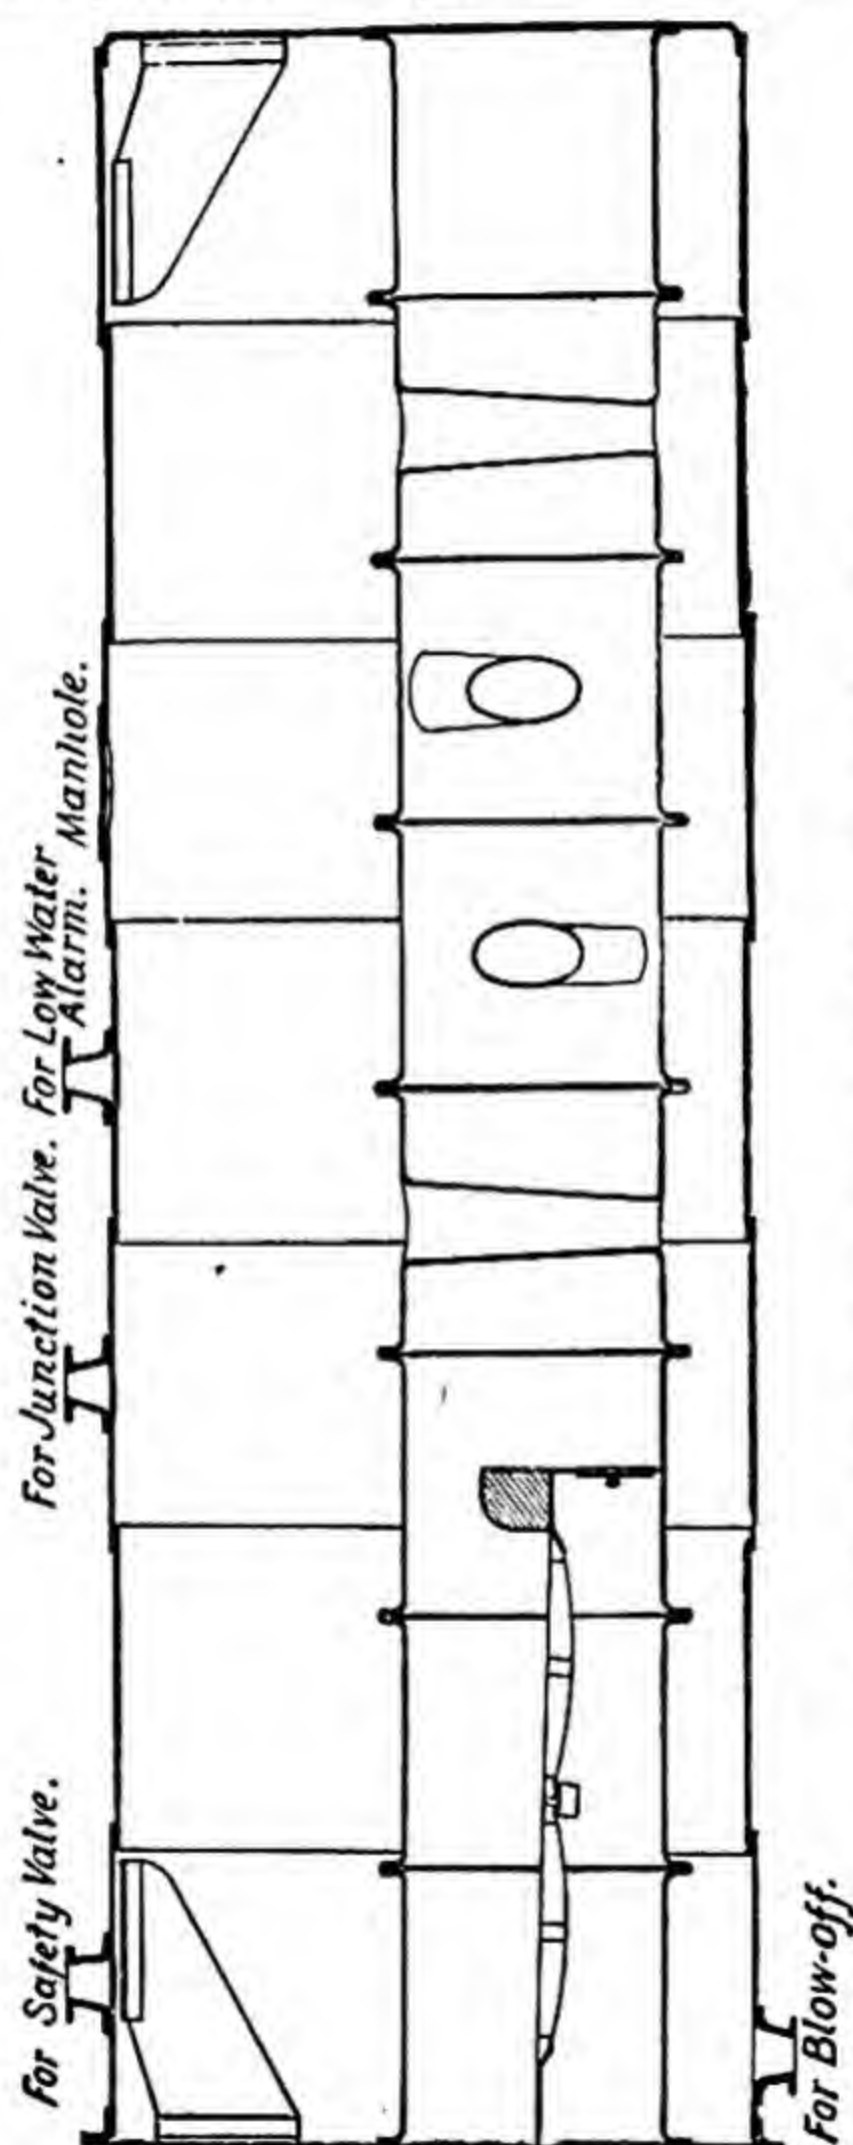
Longitudinal section of the shell of a Cornish boiler.
